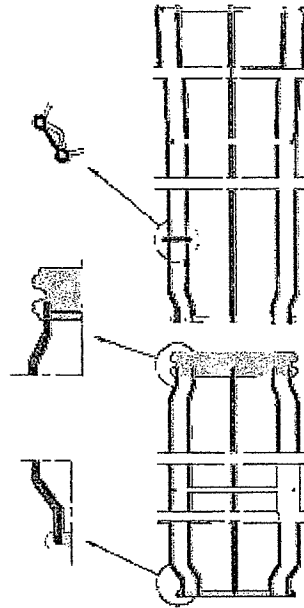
Typical LKP Filter Bag Cage (No Tools required for disassembly)
